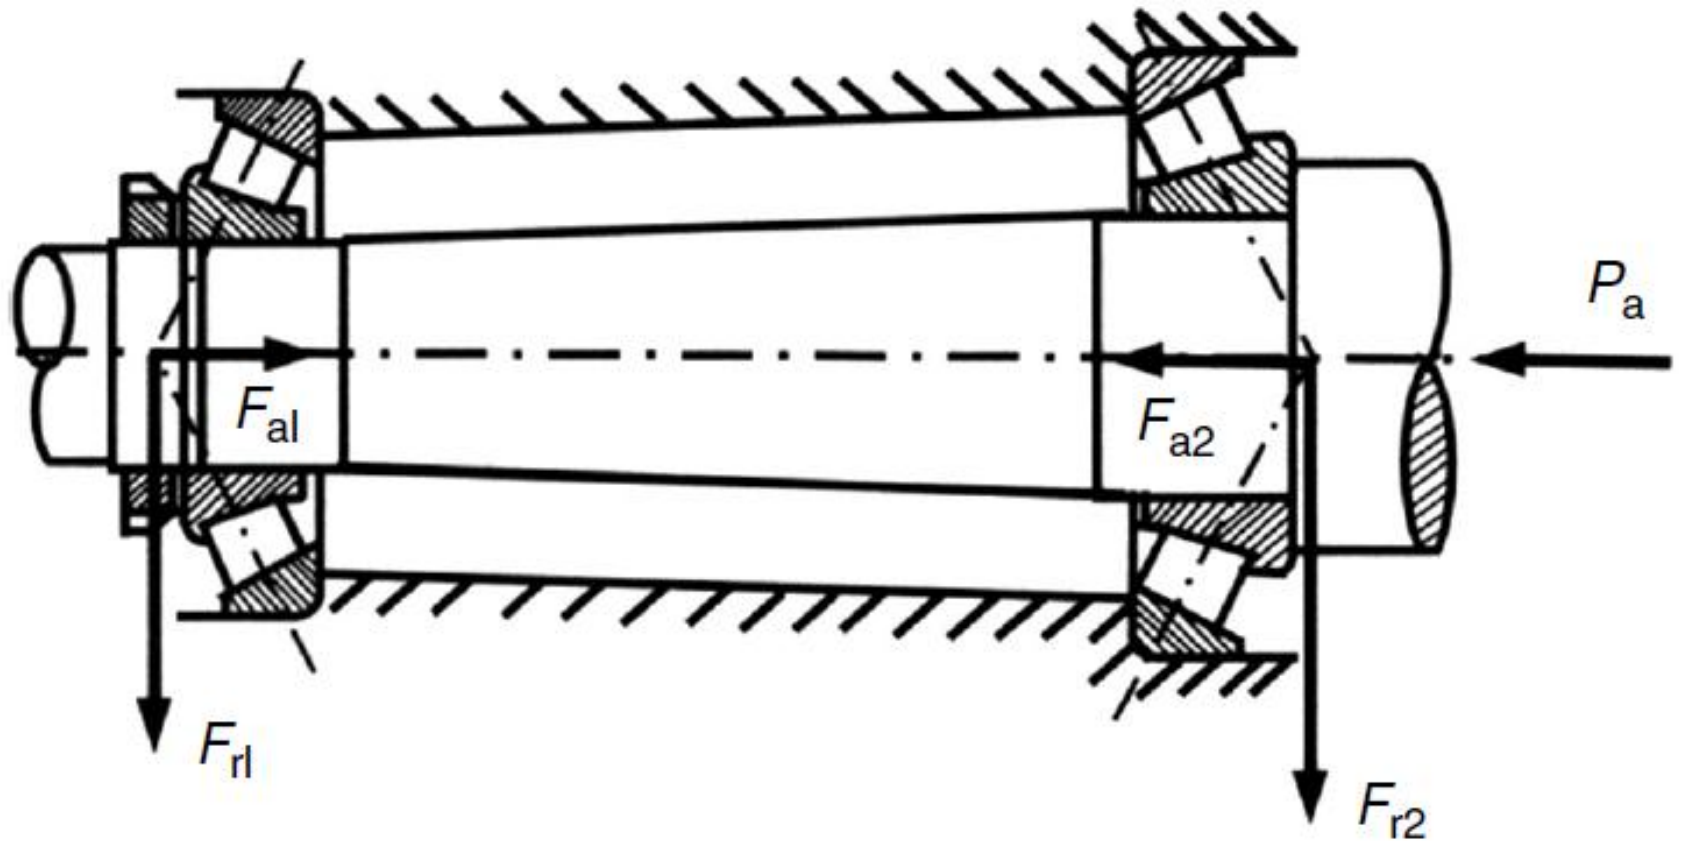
Rigid shaft mounted in back-to-back tapered roller bearings subjected to combined radial and thrust loadings.
